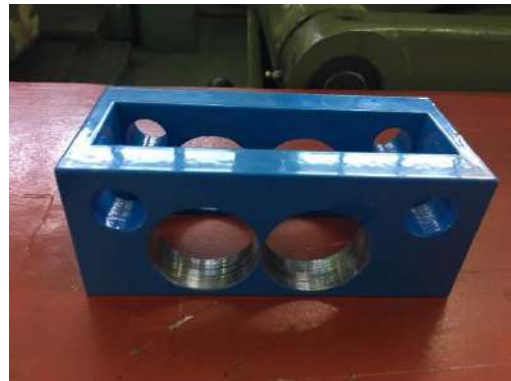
Parts of calibration device manufactured by conventional manufacturing processes
